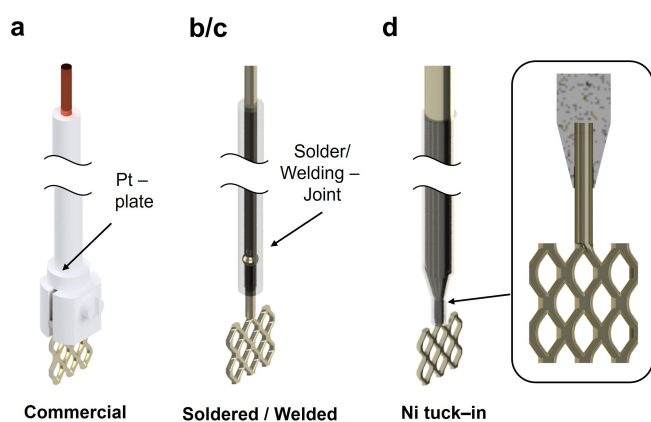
CAD representation of the four holders investigated: Commercial electrode holder (a), electrode soldered/welded to a Ni rod and PTFE sealed (b/c), electrode build in an in-house designed Ni tuck-in holder and sealed with PTFE (d).
